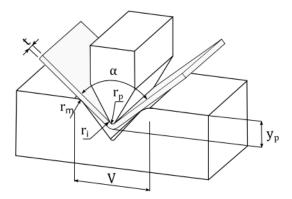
Process parameters: Sheet bending angle (α) , sheet thickness (t), punch penetration (y_p) , die opening (V), punch radius (r_p) , die radius (r_m) , inside bending radius (r_i) .
